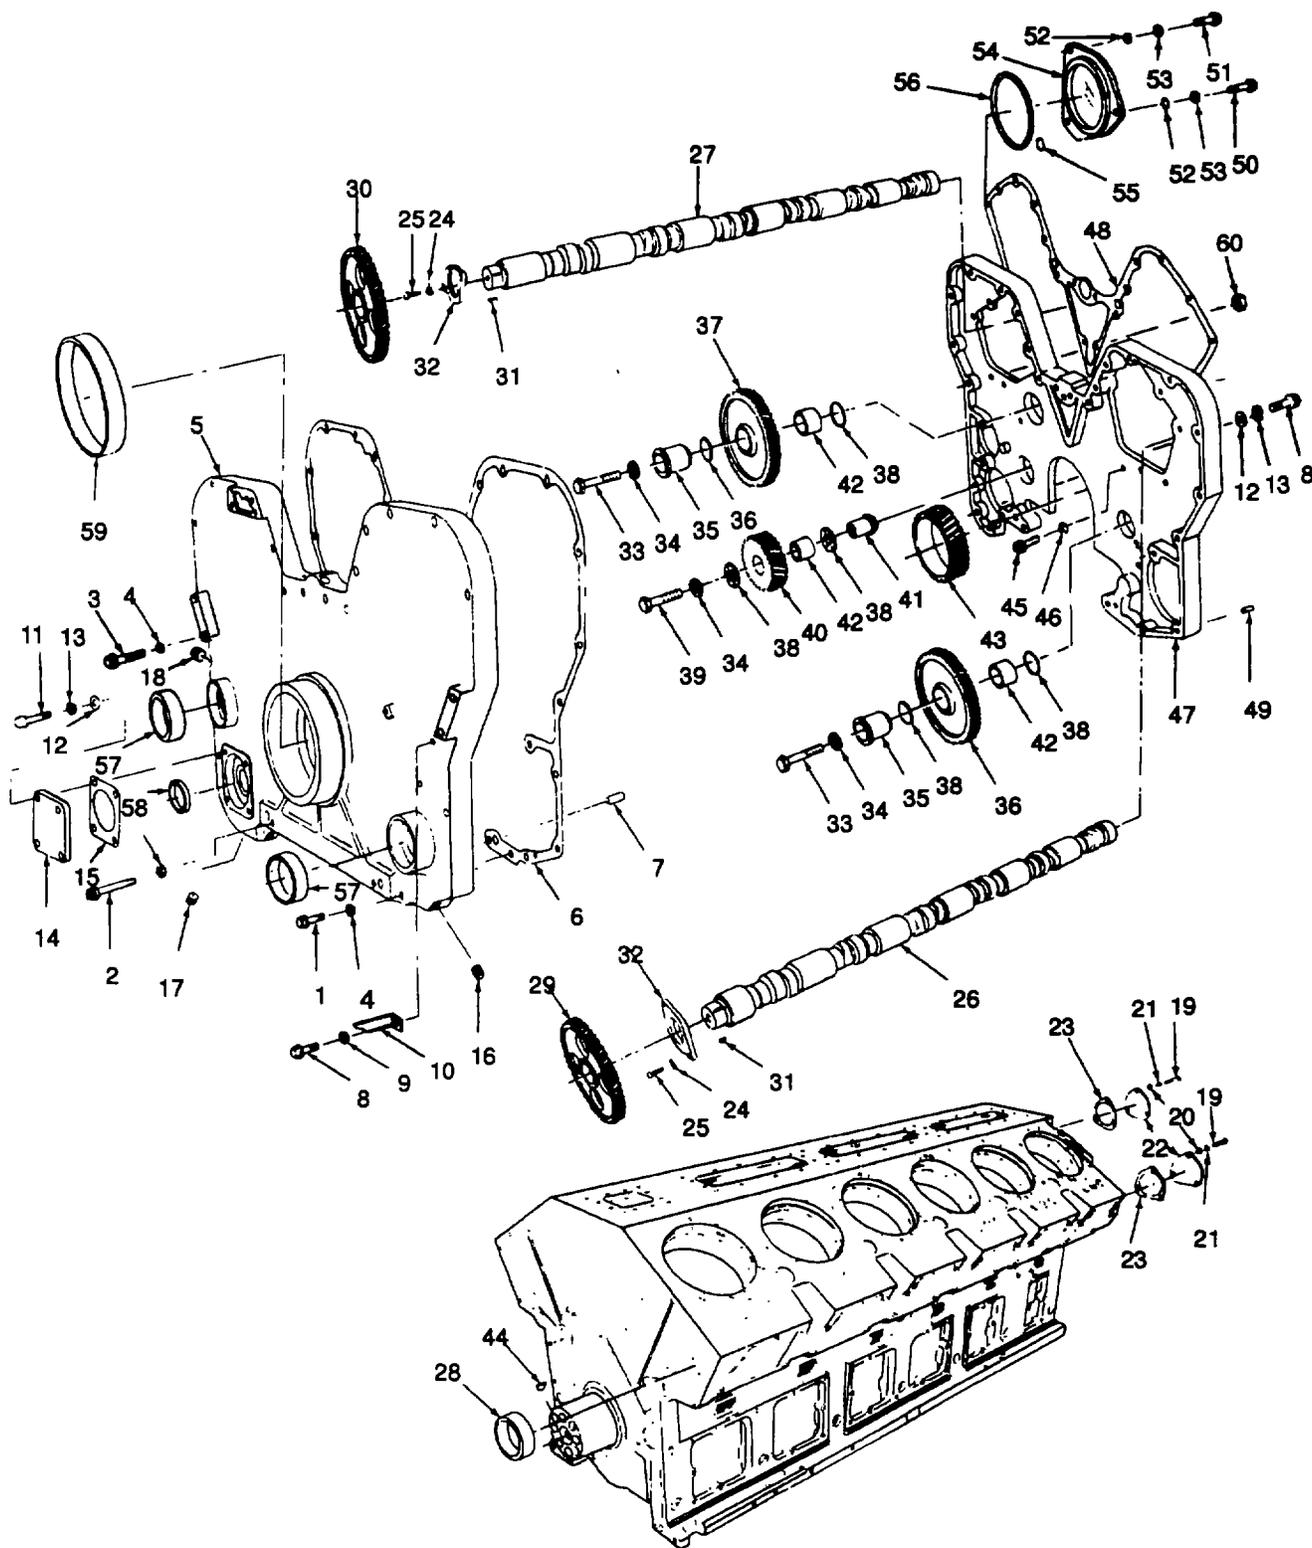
Removal and Installation of Camshafts, Bushings, and Timing Gears (Sheet 1 of 2)
